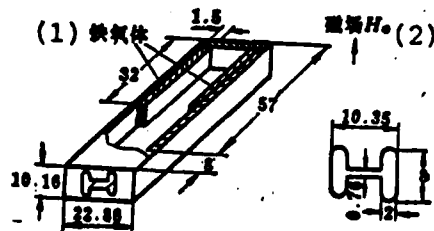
Short Circuit Wave Guide Cavity Welded With Ferrite Pieces
